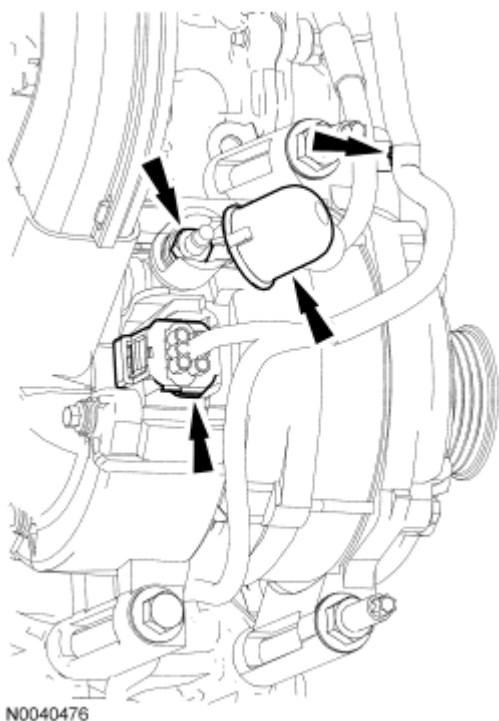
Locating Pin-Type Retainer And Generator Electrical Connections
